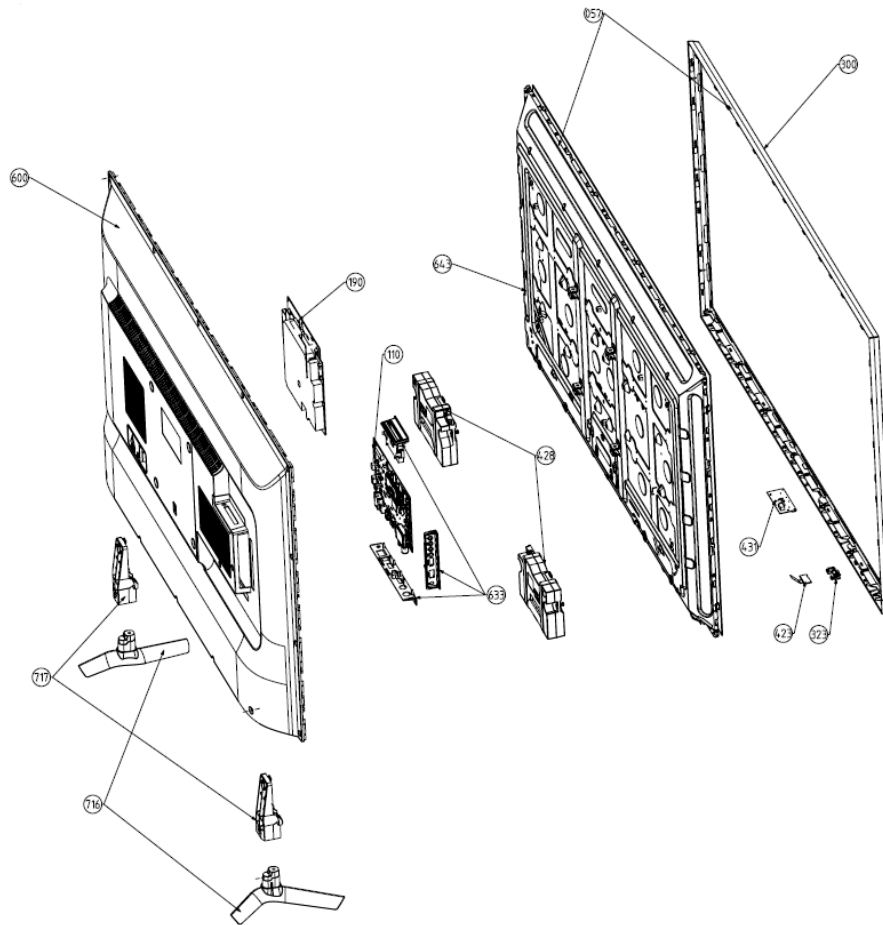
Exploded view of the TV showing the main components of the product, referenced in the table above.
